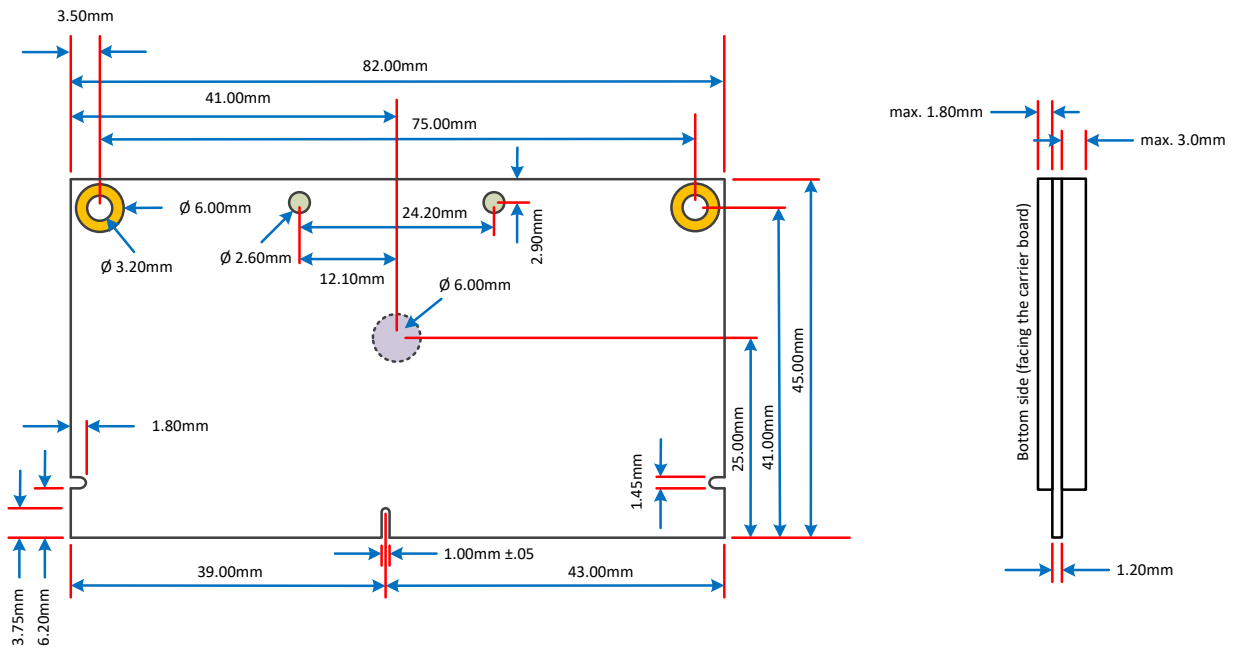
Mechanical dimensions of the Apalis module (top view)
